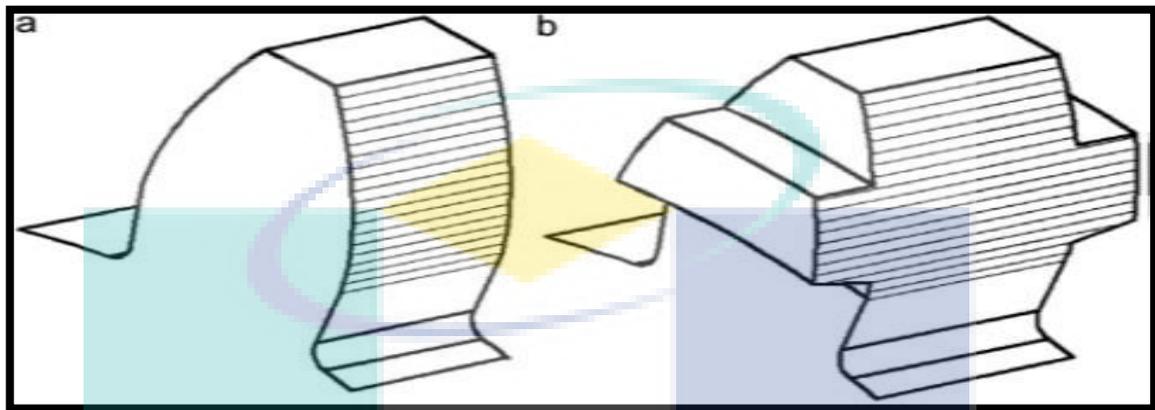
Tooth thickness reduction due to scraping of steel gear tooth [11]
